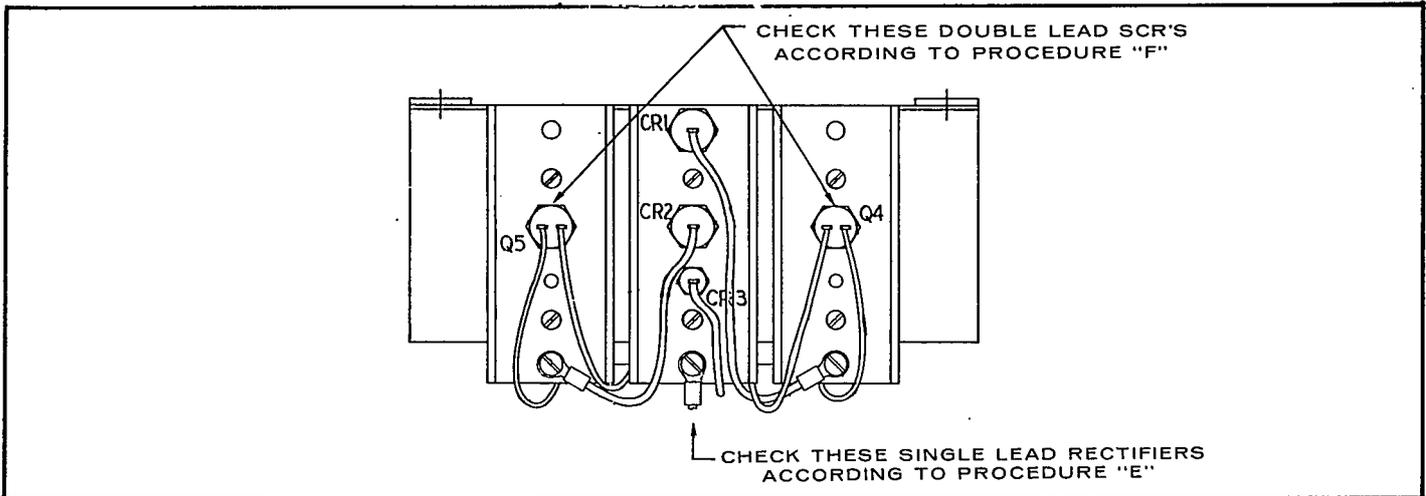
TOP VIEW OF EXCITER-REGULATOR CHASSIS ASSEMBLY
